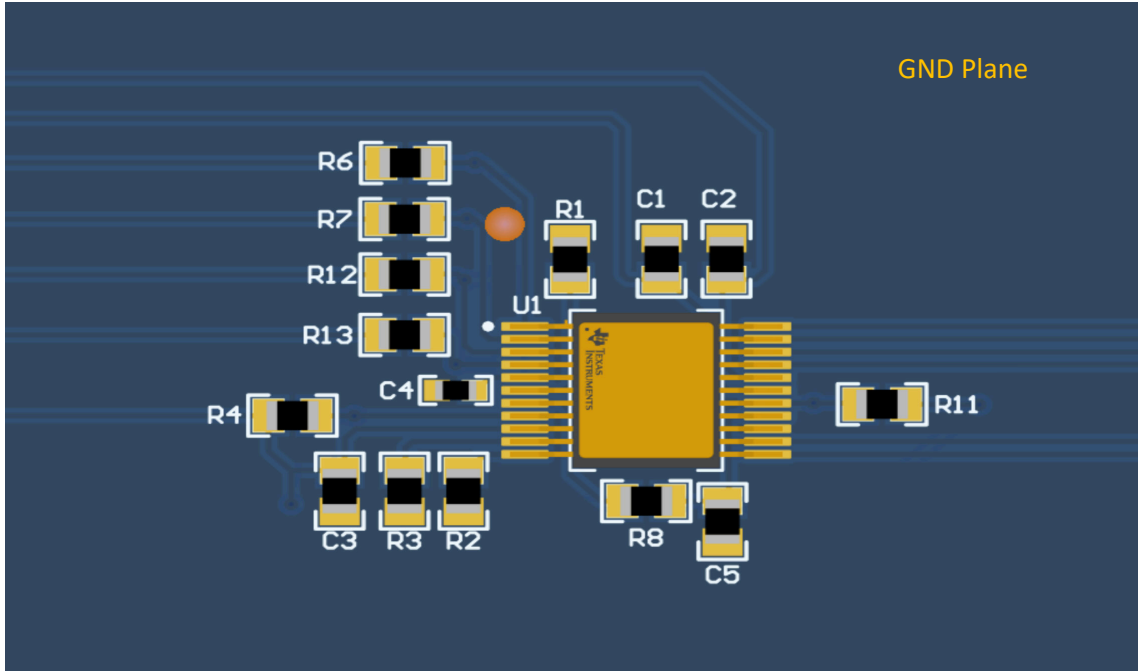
Printed Circuit Board Layout Example: Top Layer 3D View
